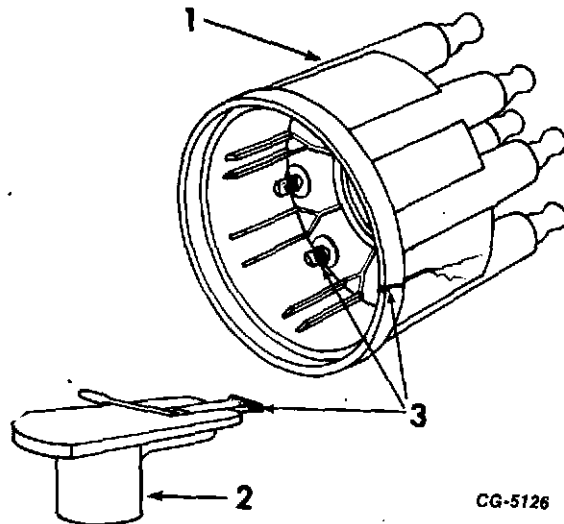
INSPECT DISTRIBUTOR CAP AND ROTOR
